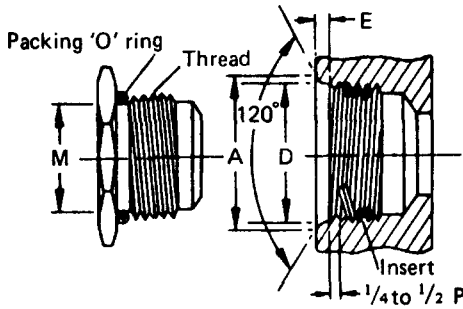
Example of a corrosion-resistant steel insert used in an aluminum casting.
